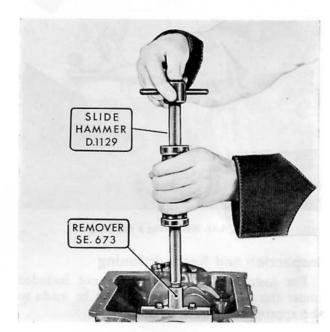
Removing the rear main bearing cap. This method can also be used for the front cap removal
